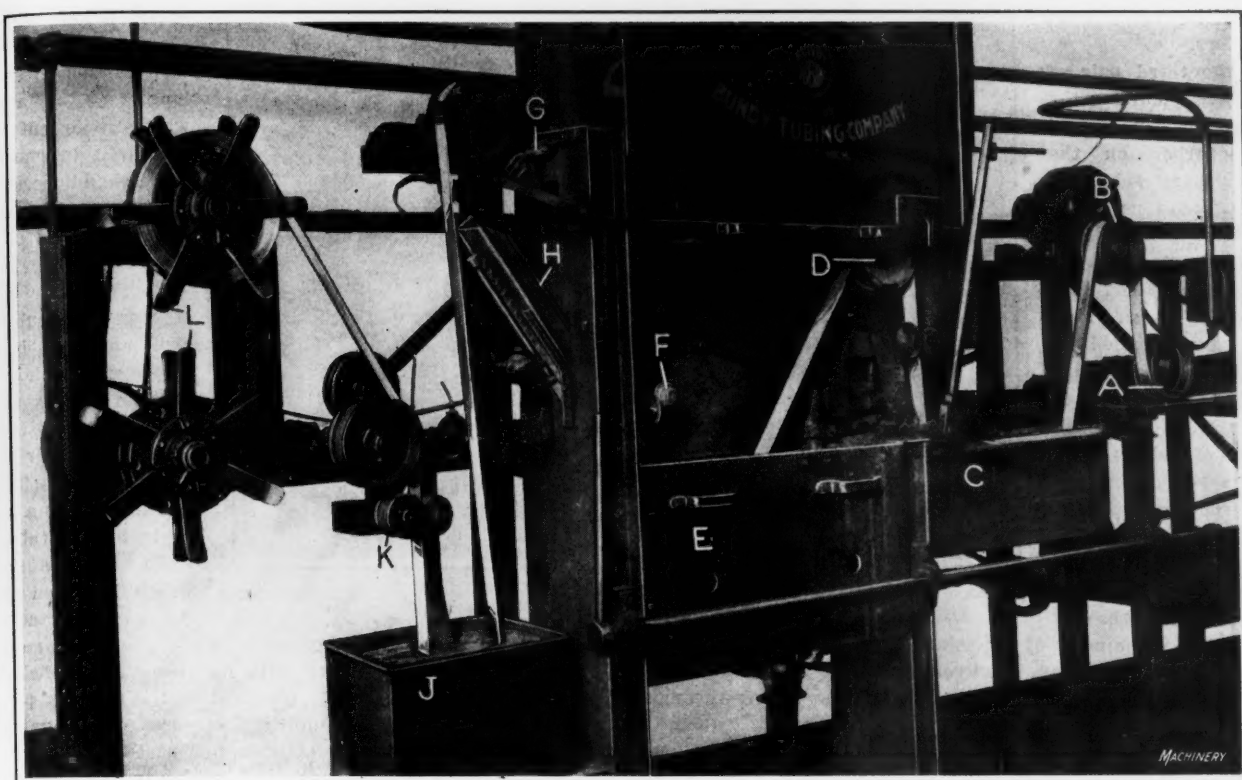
Left-hand End of the Tinning Machine shown in Fig. 1
